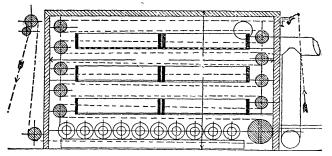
Carbonizing Machine for Wool and Piece Goods.
